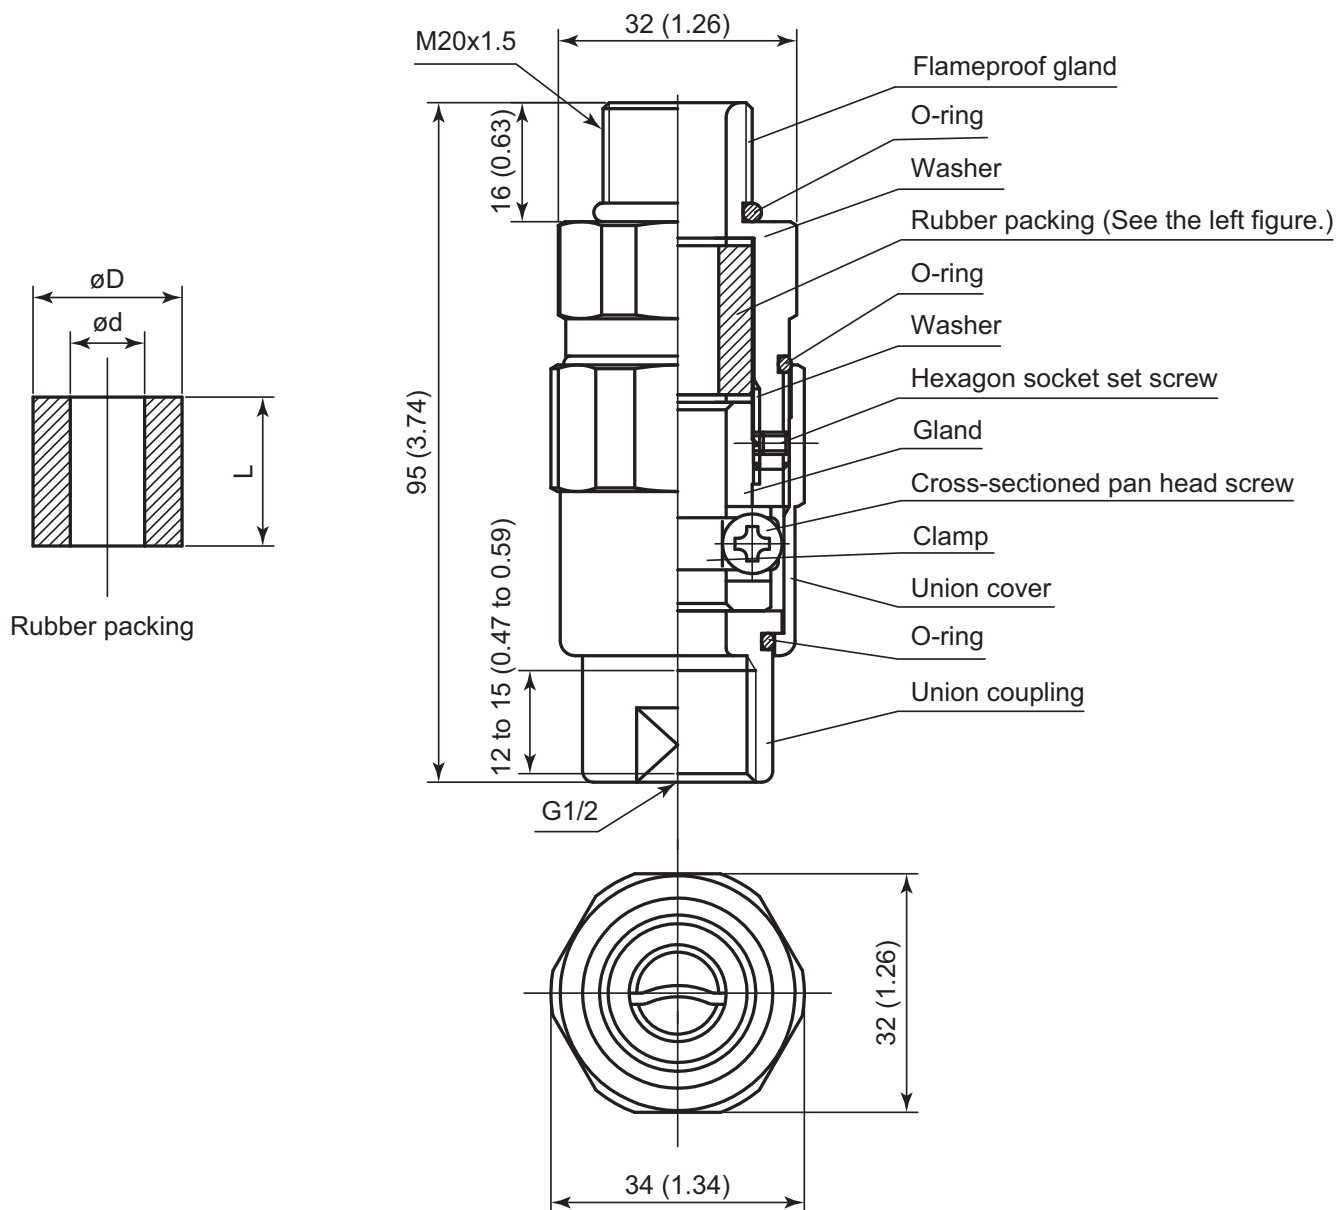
Dimensions of cable gland (option V5_), in mm (inch)
